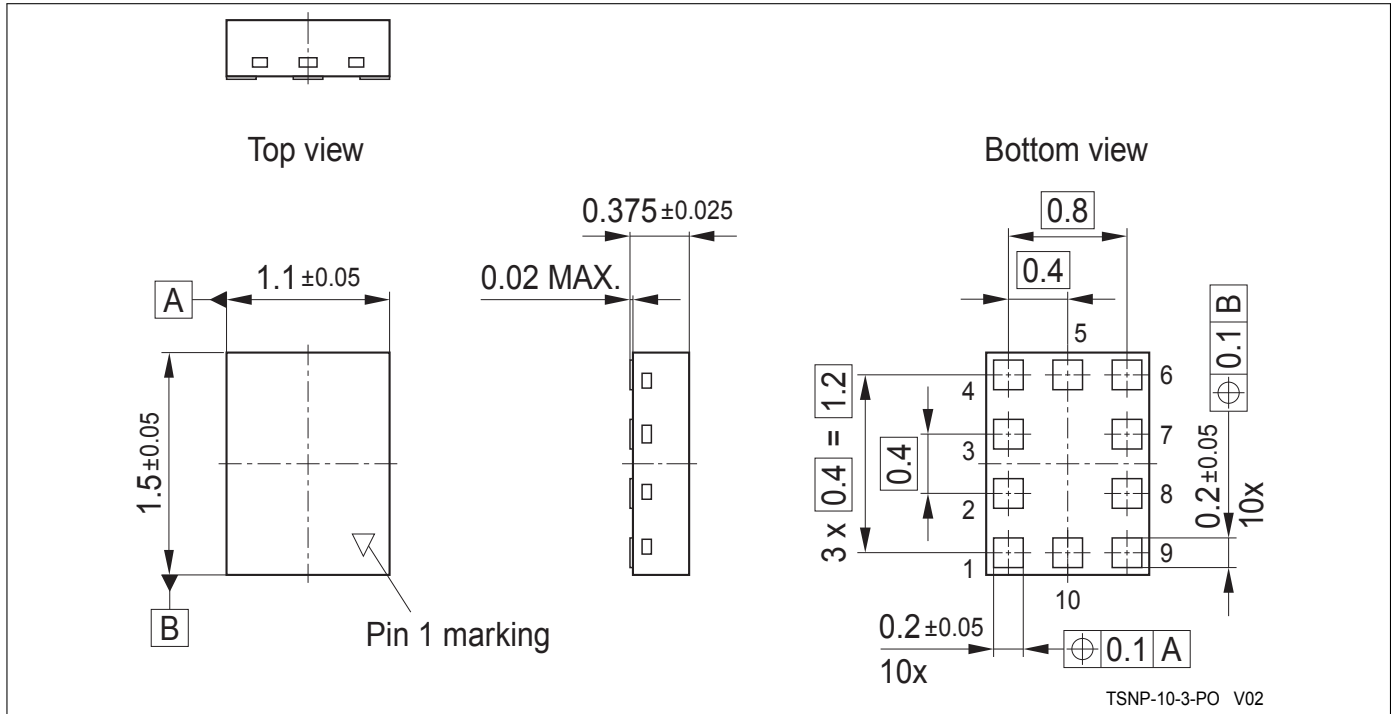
TSNP-10-3 Package Outline (top, side and bottom views)
